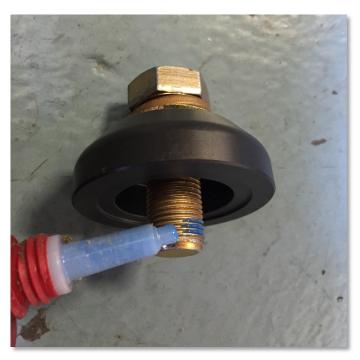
A view of the strut rod fitted to the mounting point on the chassis.
